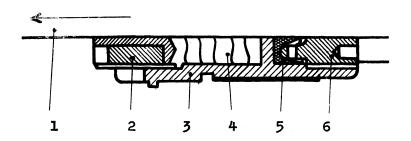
RECOIL BRAKE REAR STUFFING BOX ASSEMBLY
